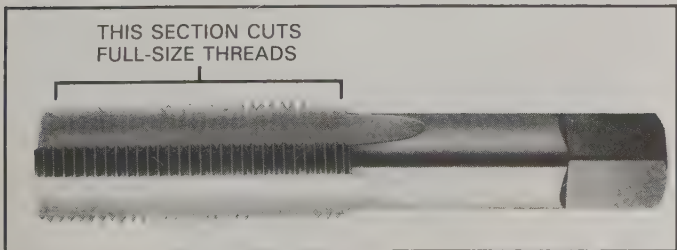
A bottoming tap is used to cut threads to the bottom of a hole. (Triumph Twist Drill Co.)
